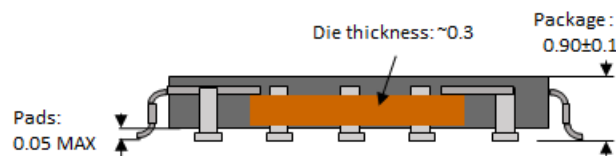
PQFN package dimensions in millimeters used on both IOR3899 and TSP54494 converters
